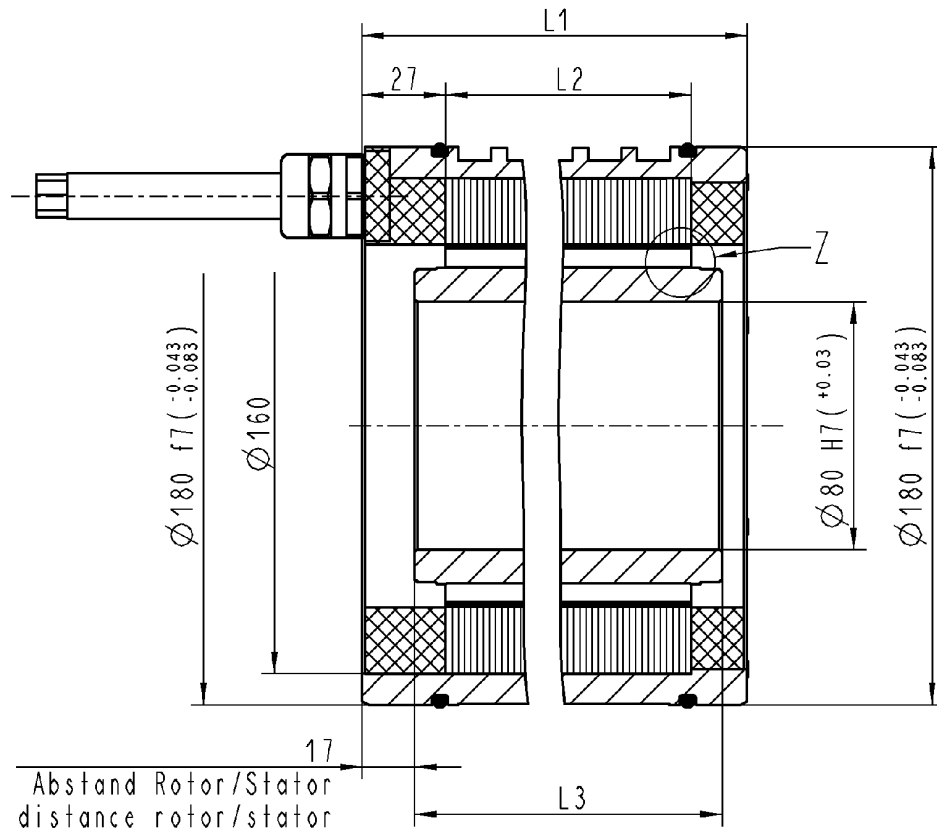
Dimension sheet for rotor and stator (natural convection), mounted
